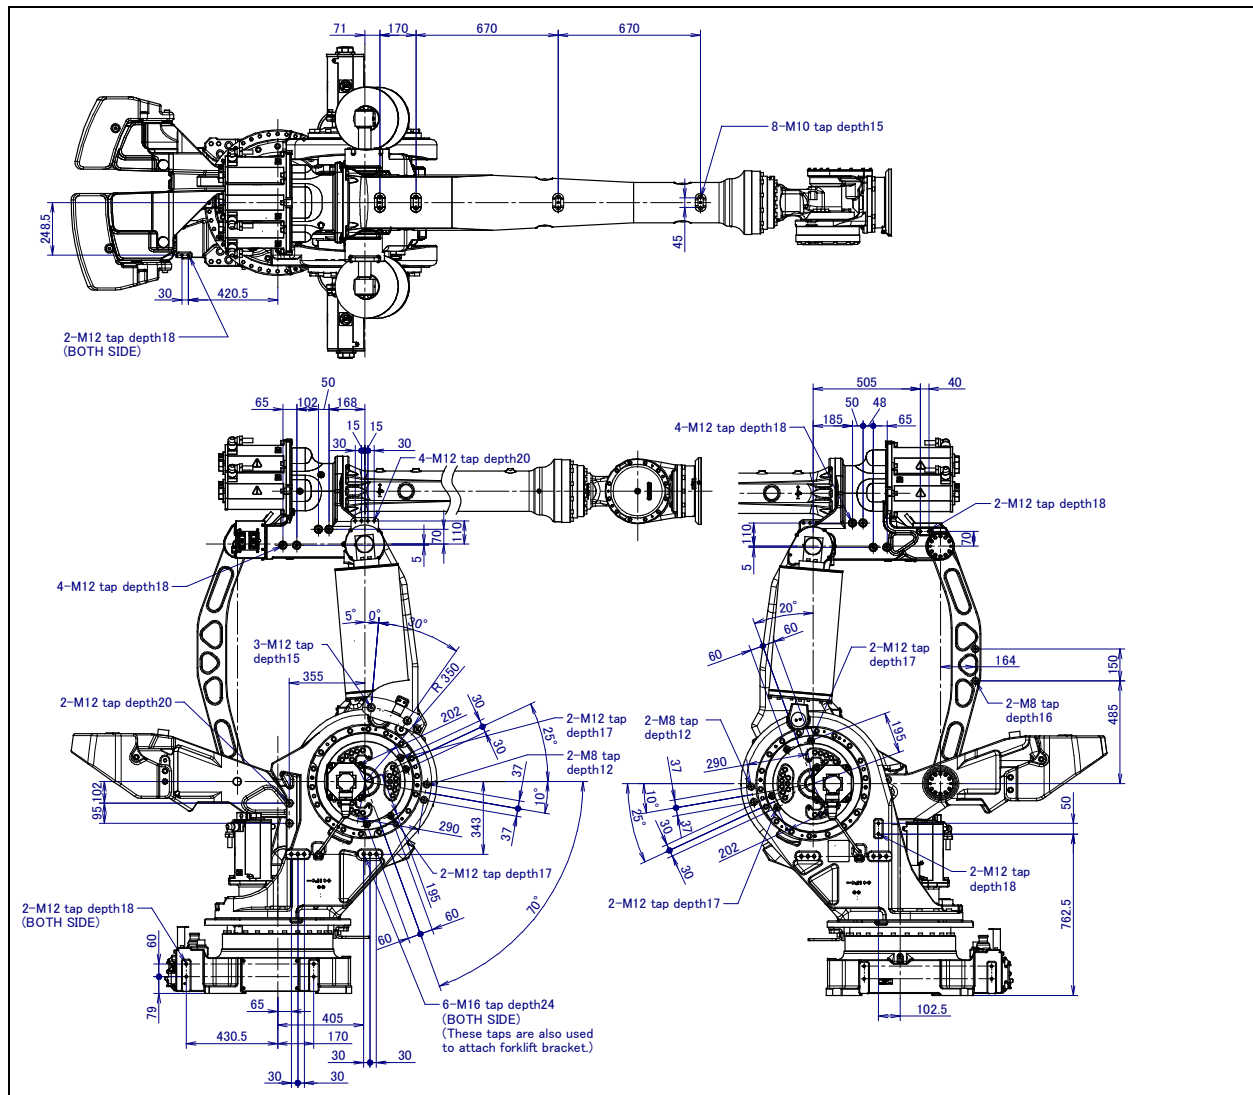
(b) Equipment mounting faces (M-900/A/400L)
